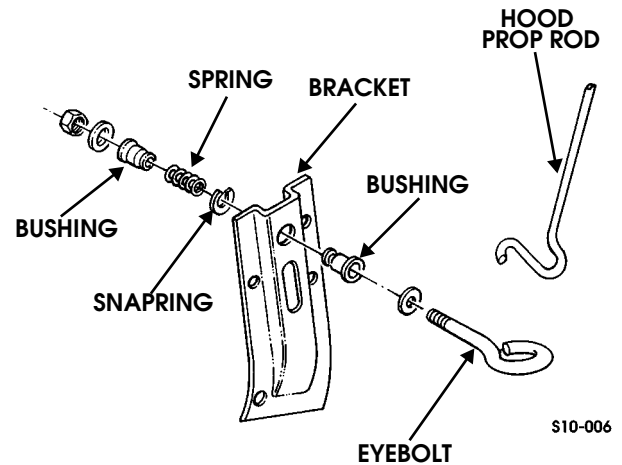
Hood Prop Rod and Bracket Assembly Breakdown
